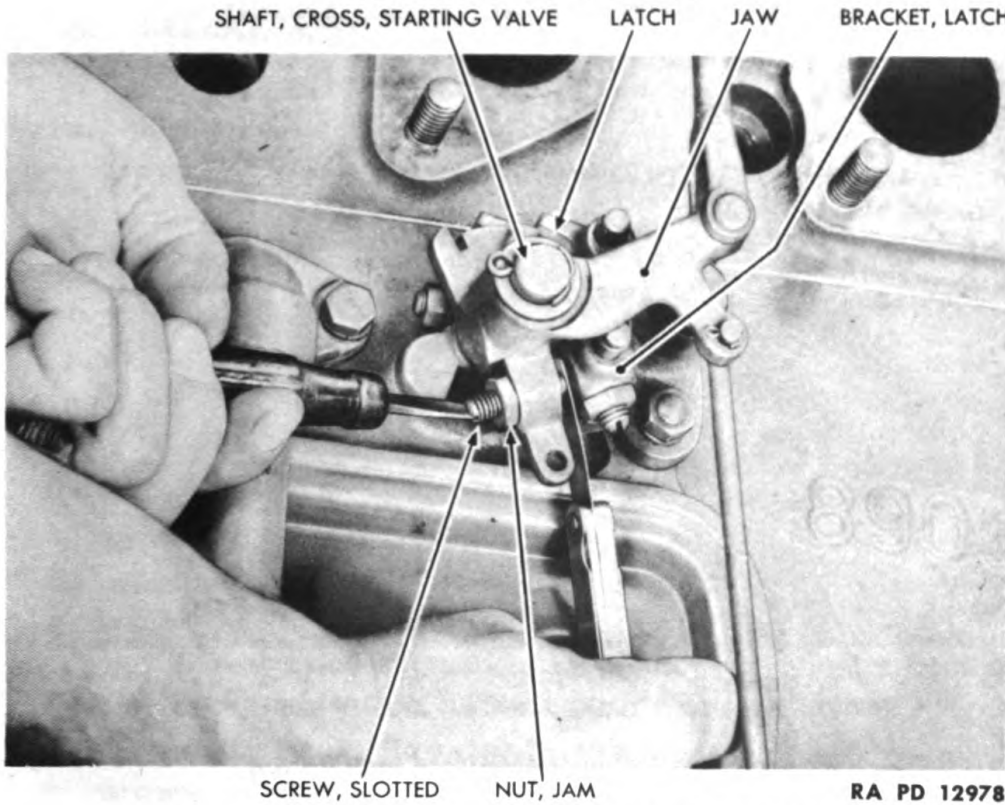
Adjusting Clearance between Starting Valve Cross Shaft Jaw and Latch Bracket
